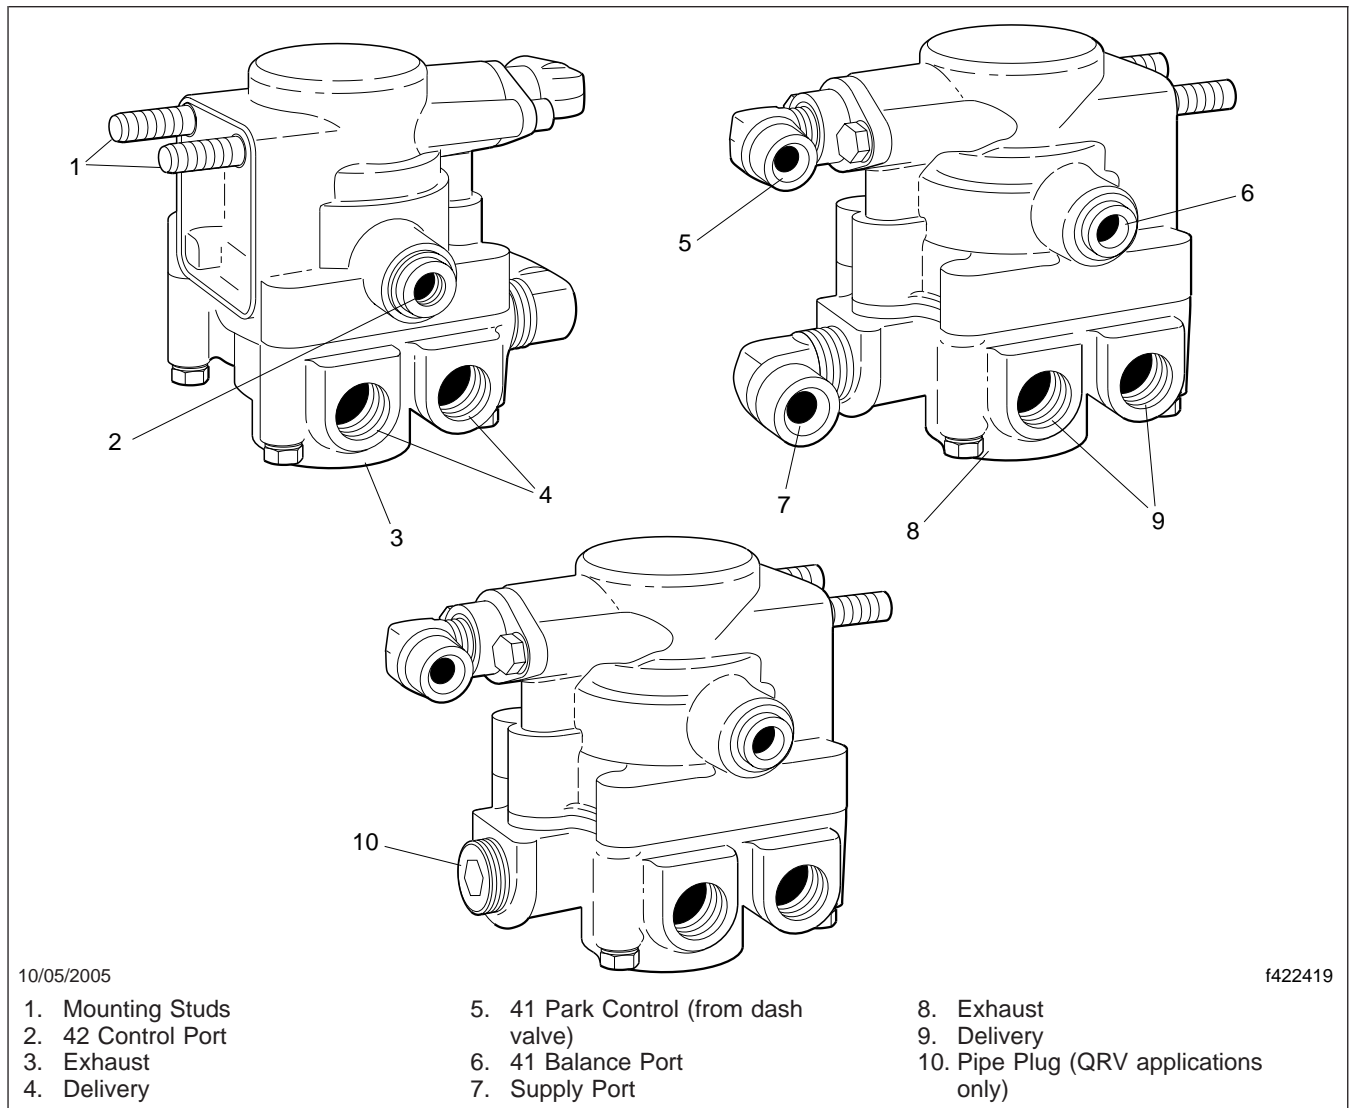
, SR-7 Spring Brake Modulating Valve (exterior views)
